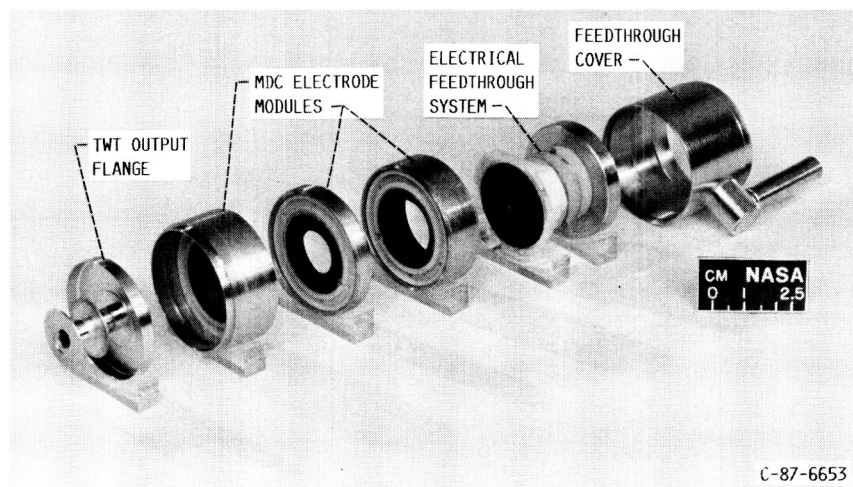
Exploded view of four-stage, isotropic graphite electrode depressed collector ready for final assembly by welding.
